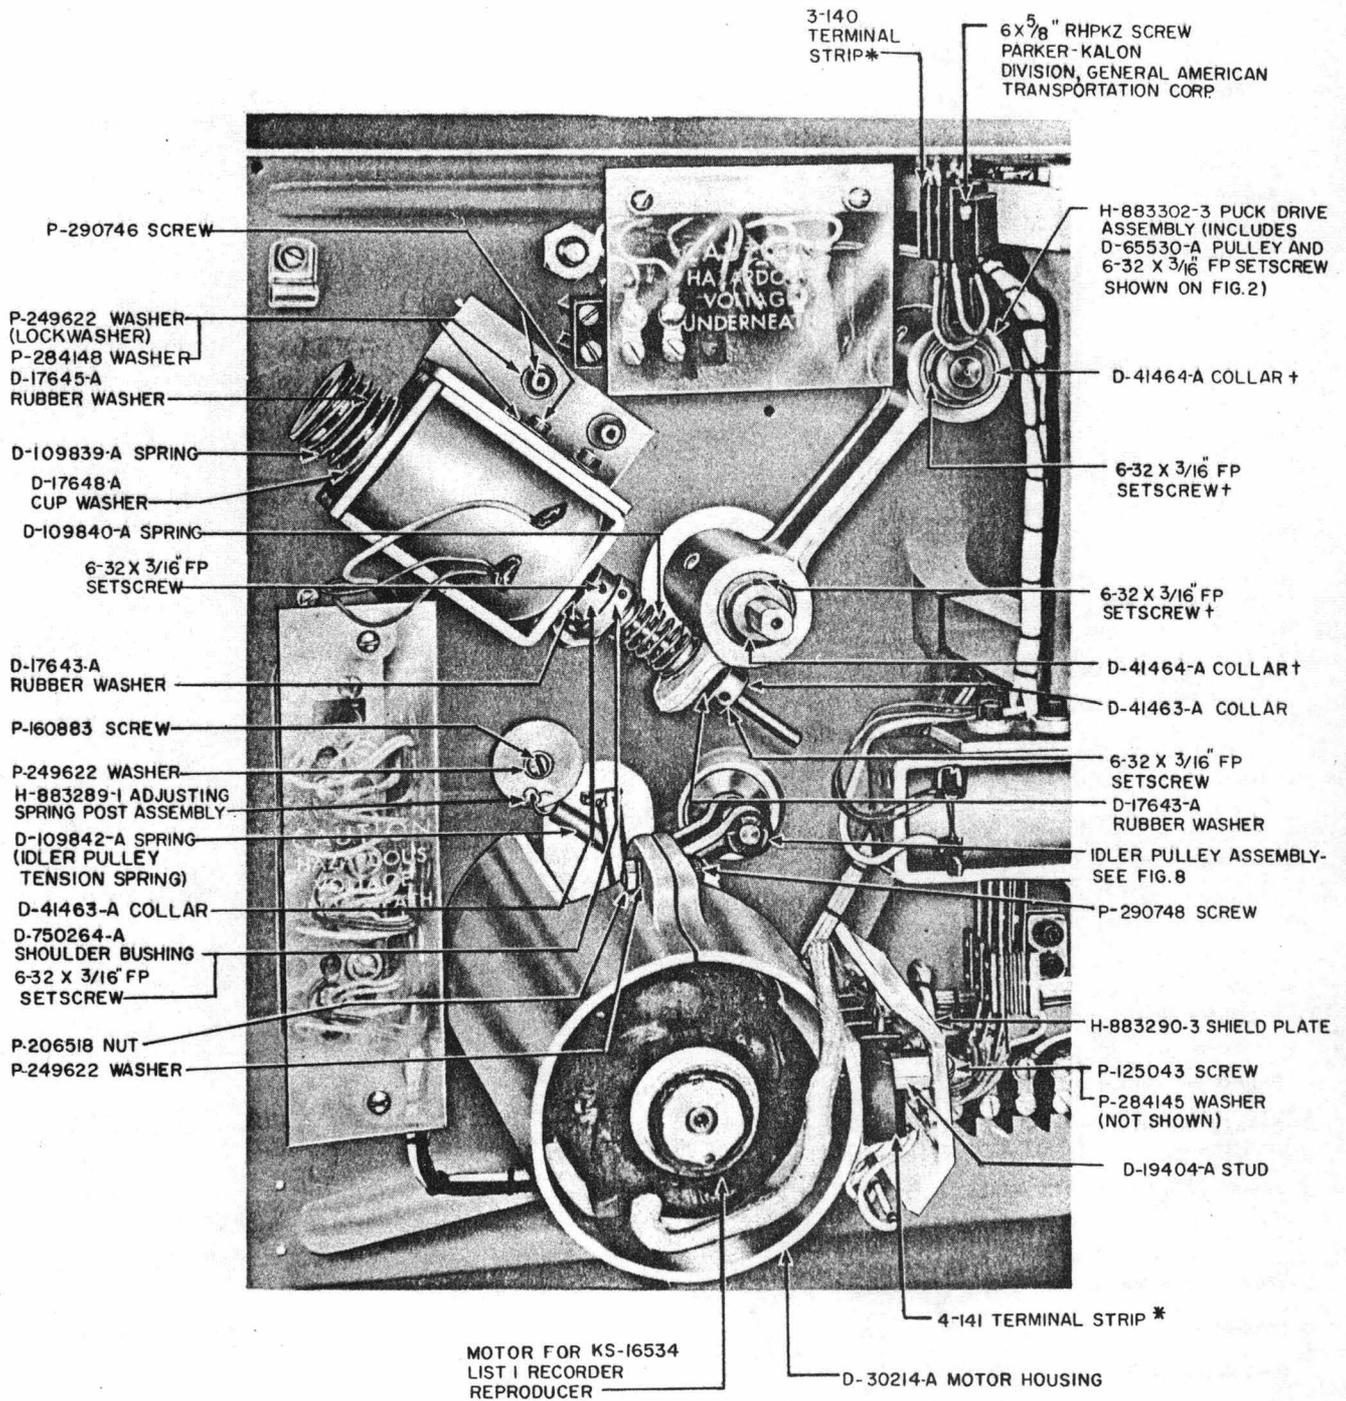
Recorder-Reproducer Mechanism - Rear View (Cover Removed)
